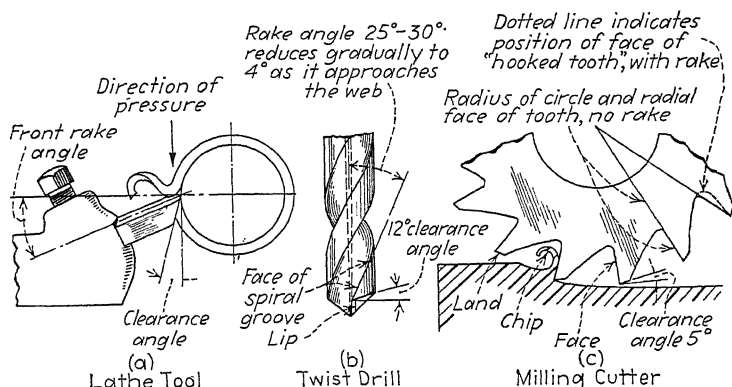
Shows clearance and rake on three much-used machine-shop cutting tools.
